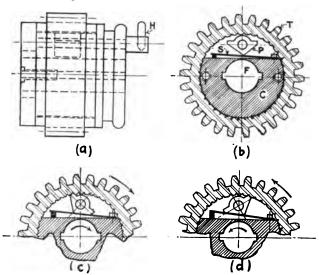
A.—Inclosed type of feed gear, ratchet and pawl, or "trigger gear." The pawl carrier C is a bushing fitting over the feed screw F or the feed rod as the case may be, and fitting freely within a fairly large hole in the gear T. A portion of the bushing is cut out to receive the trigger type of pawl P and the flat spring S that holds it in place. Notches are cut lengthwise through the hole in the gear to form the ratchet teeth. The handle H serves to change the trigger to any one of three positions as shown in (b) (c) and (d).
